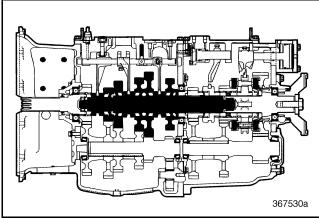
Front Mainshaft Component Locator (T313L/T318L Shown)
